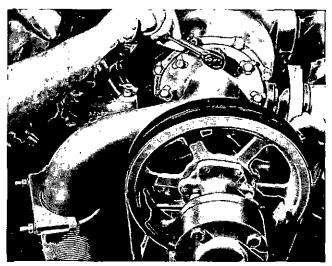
Removing turbocharger exhaust connection VT8-430
